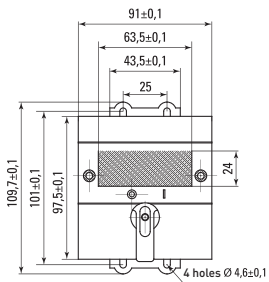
Overall dimensions of motor mechanism VA-99M 100
